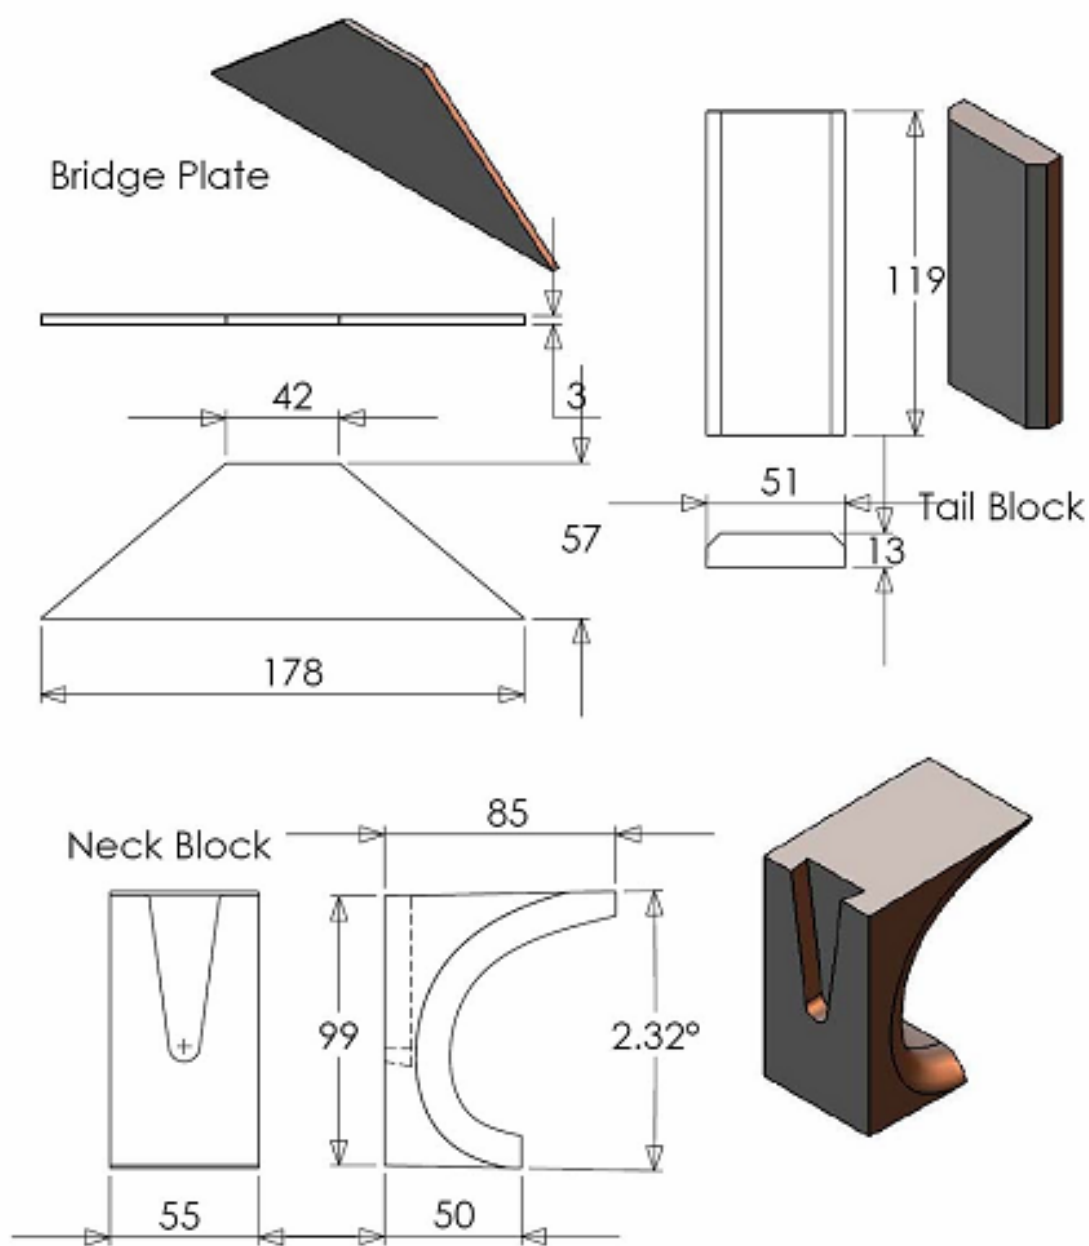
Machine drawing of the bridge plate, tail block and neck block.
